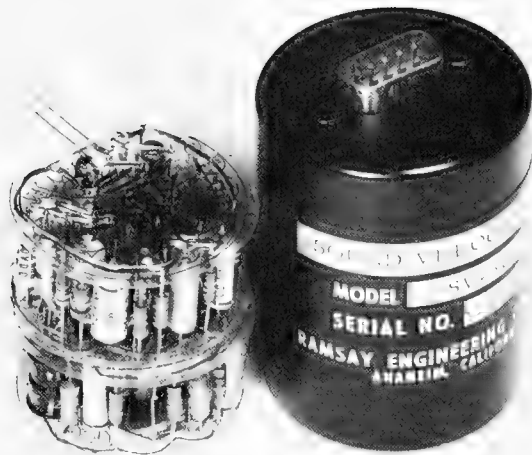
Sound Velocity Oscillator Showing Welded-Cordwood Construction.
